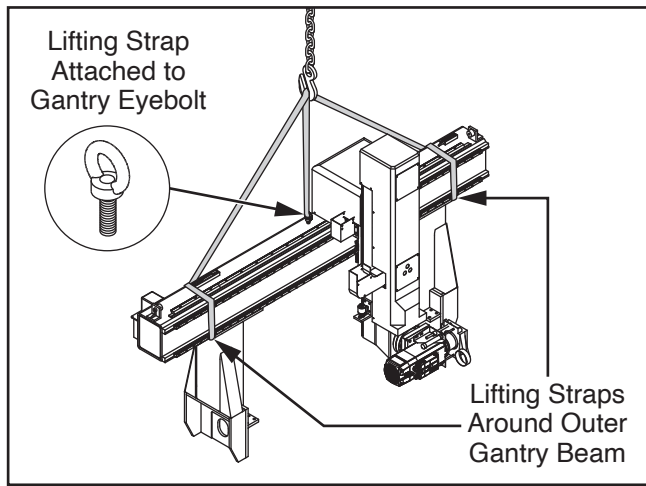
Lifting straps connected to eyebolt and gantry beam.
